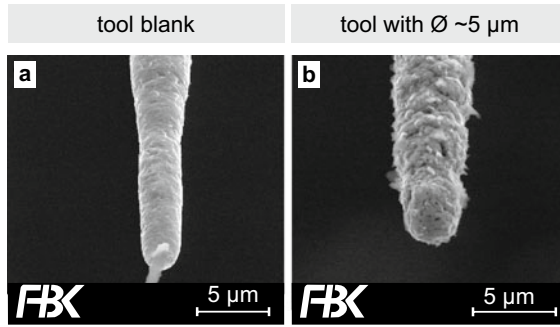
MPGTs with a diameter below $5 \mu\text{m}$. a tool blank, b coated tool according to [29]
